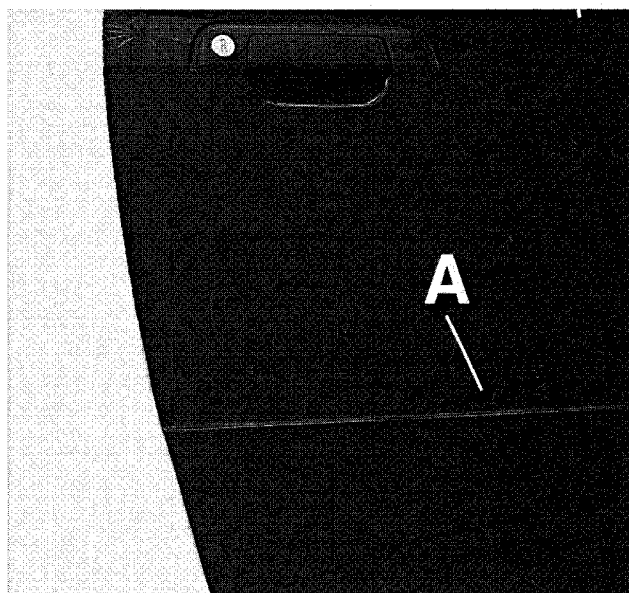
Using 4mm Allen socket, reach through rear bore hole (A) in door to remove window guide bracket bolts. (Exterior door molding has been removed.)
